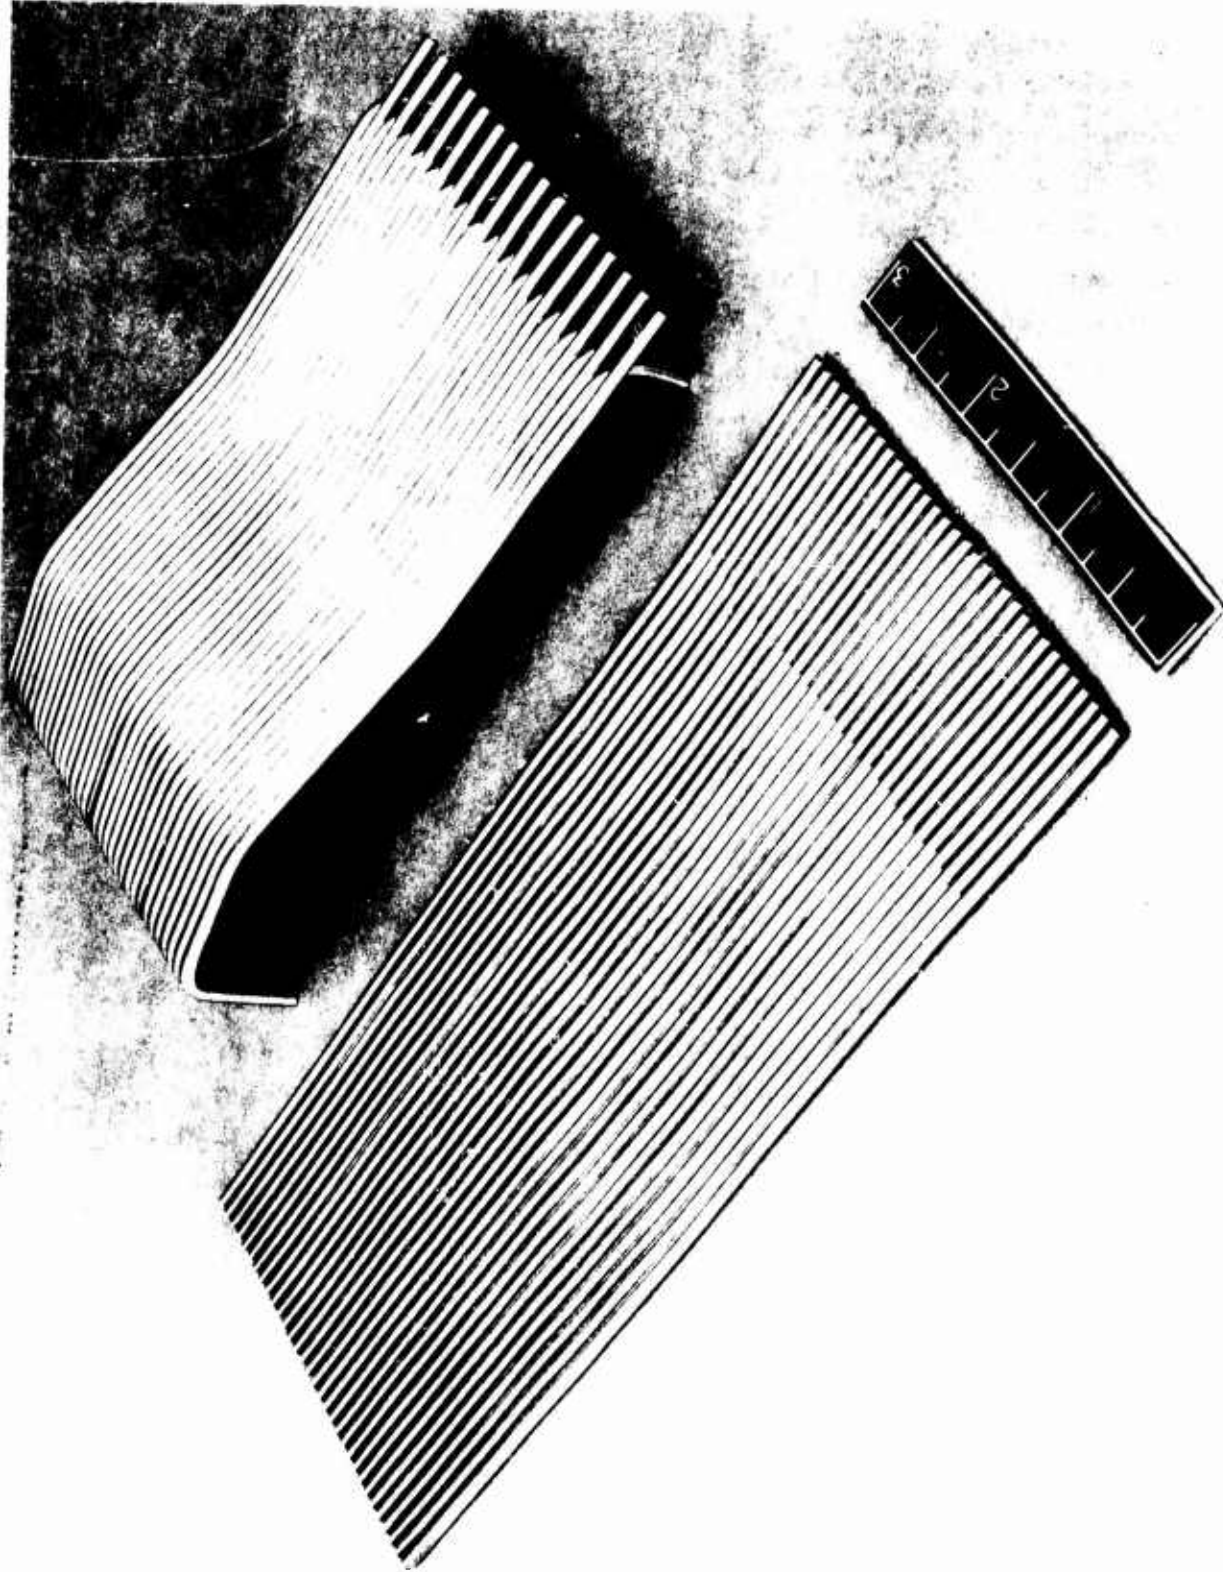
Sample EB-Welded Tube Blankets
